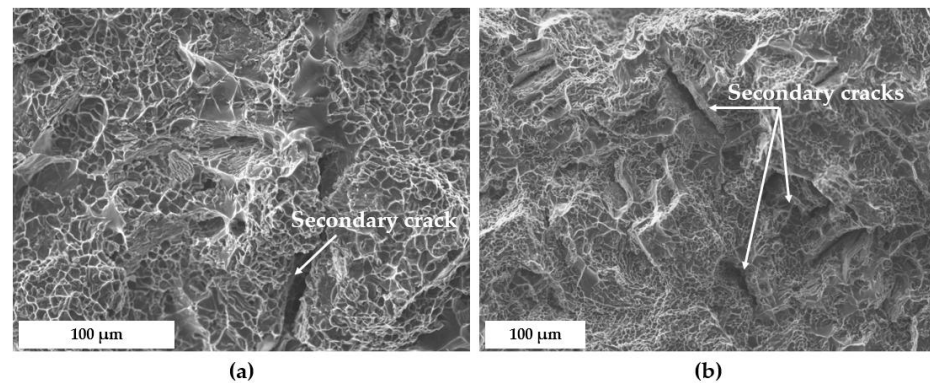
SE micrographs at high magnification showing the details of secondary cracks on the fracture surfaces of tensile specimens in (a) ST1 and (b) ST4 conditions.
